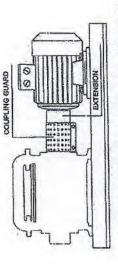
CHECKING ALIGNMENT ON BASE MOUNTED PUMP DESIGN
